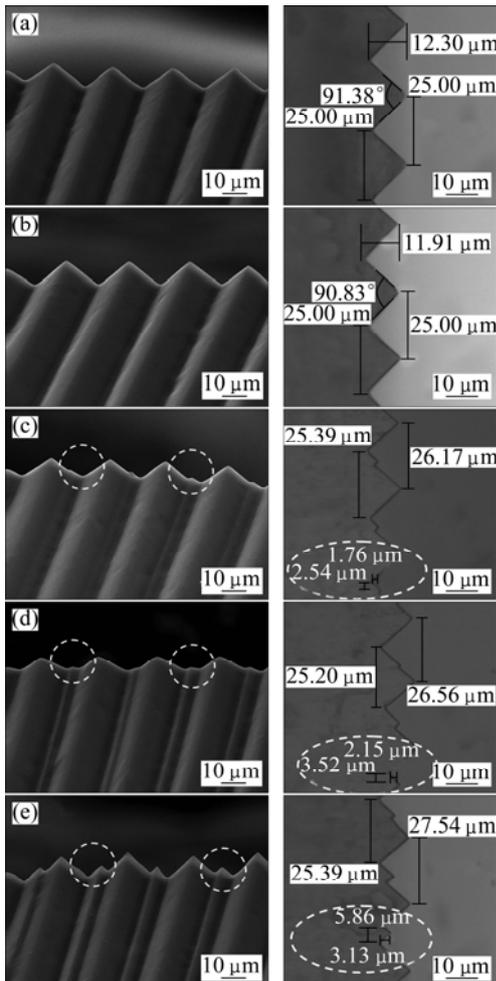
Features of machined patterns on roll mold surface: (a) Point A; (b) Point B; (c) Point C; (d) Point D; (e) Point E
